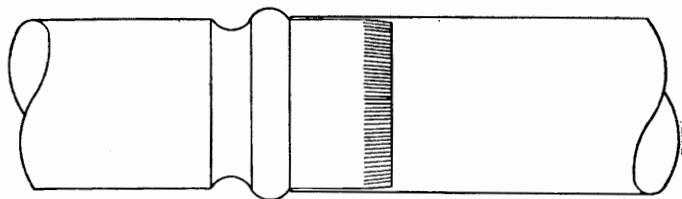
Plain Lap Pipe Joint, Showing Crimped Edge.
